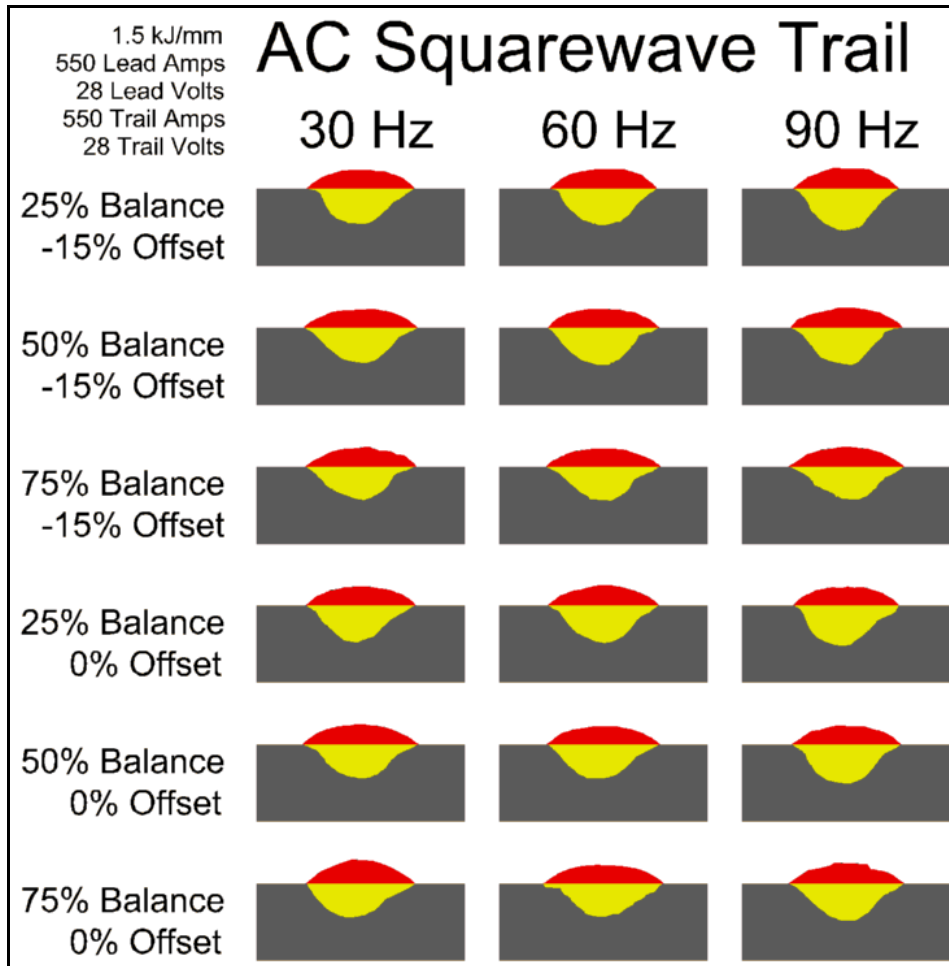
Group 4 Weld Bead Cross-Sections
